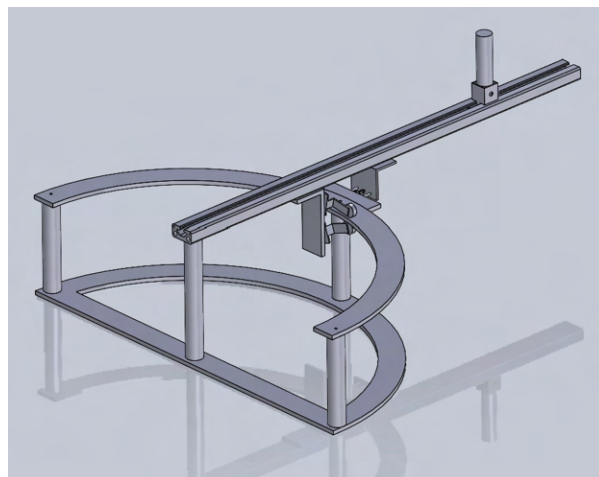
This figure shows the assembly CAD of the final design. The cylindrical handle is inserted into the slider.
